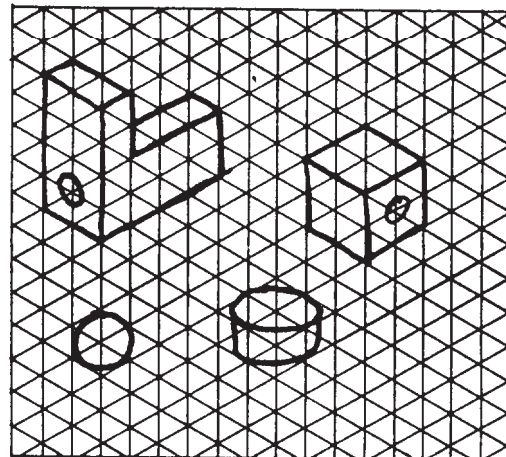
Use of specially ruled isometric paper in technical sketching.
